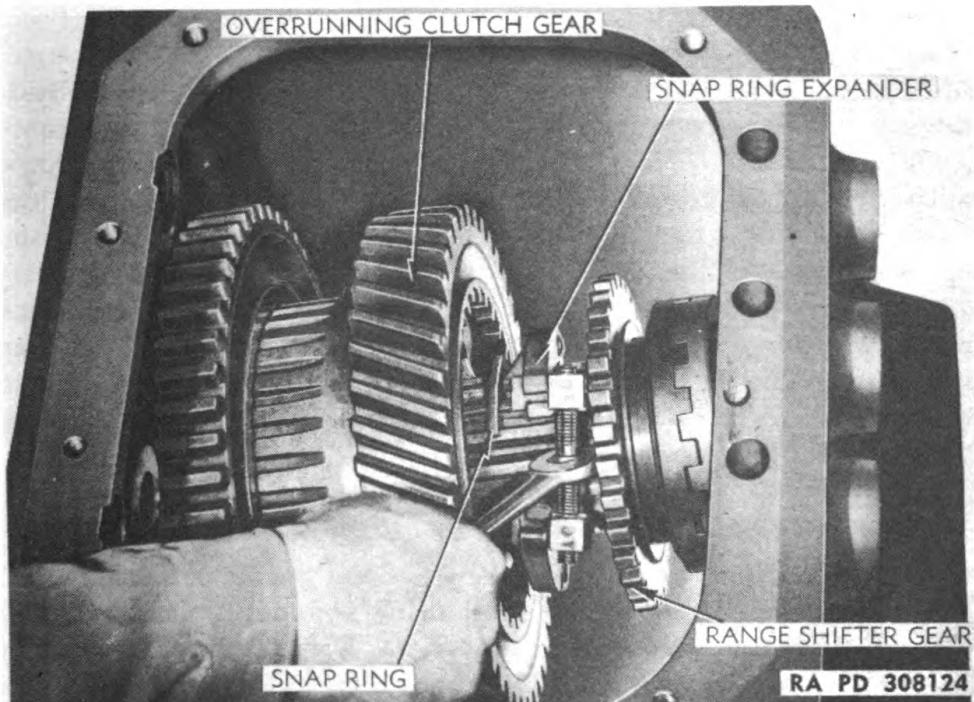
Spreading Snap Ring, Using Spanner Wrench
